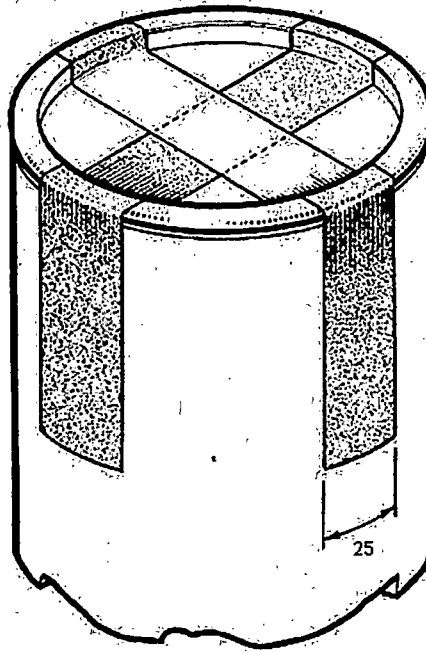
Closures - Cylindrical Containers with Internal Fitting End Pieces
